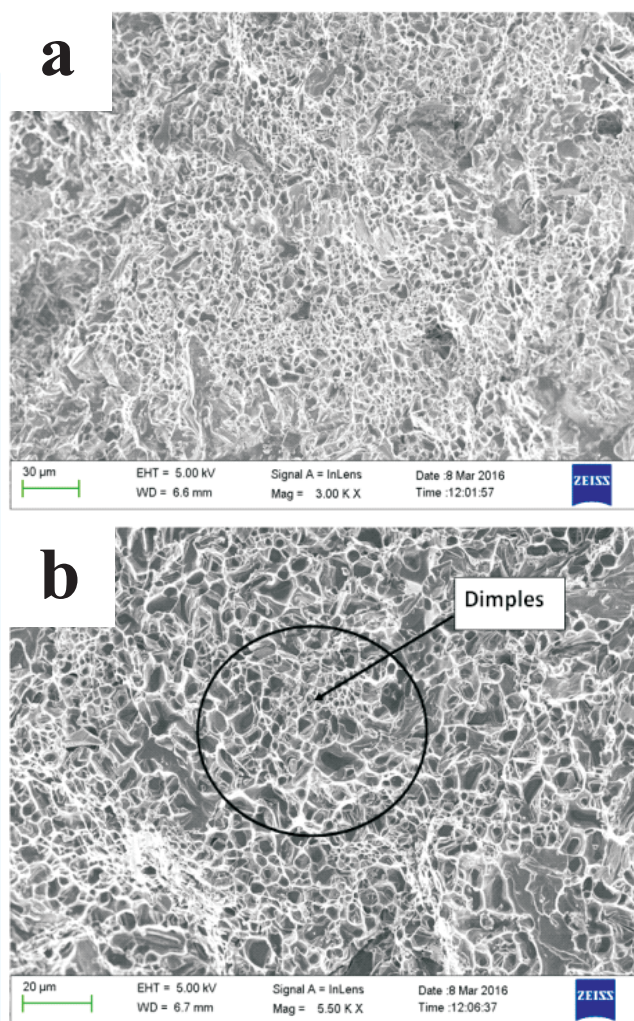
Fracture surface of the tensile tested samples at (a) low and (b) high magnification.
